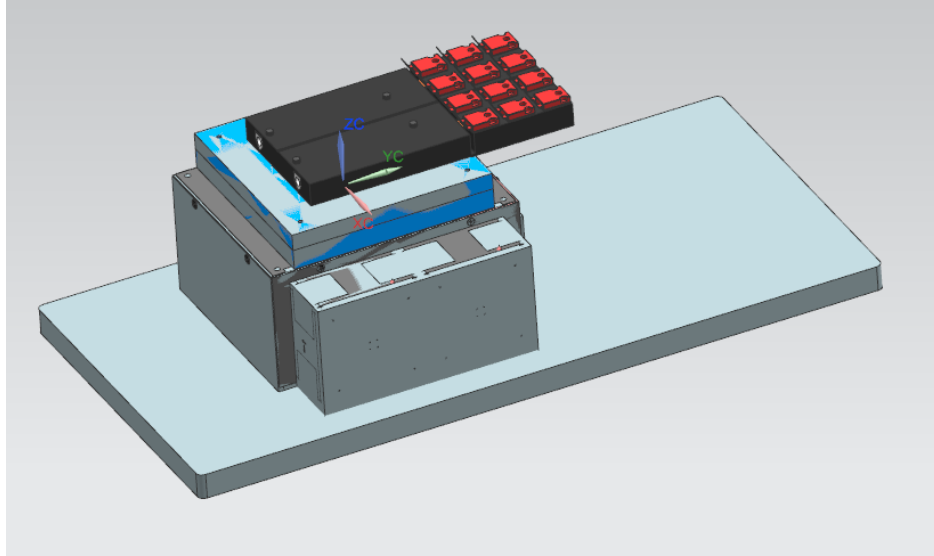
Prototype #4: Passive cooling heat source mounted to conventionally assembled cold plate including 3-piece SLM aluminum alloy block, gauge 20 silver off-the-shelf plate, ceramic pipes with LM inside.
